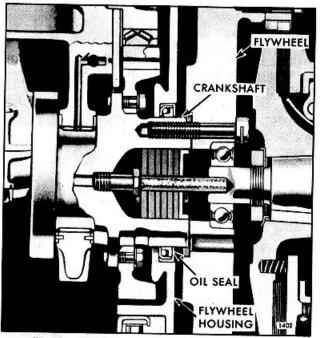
Crankshaft Rear Oil Seal-Single Lip
